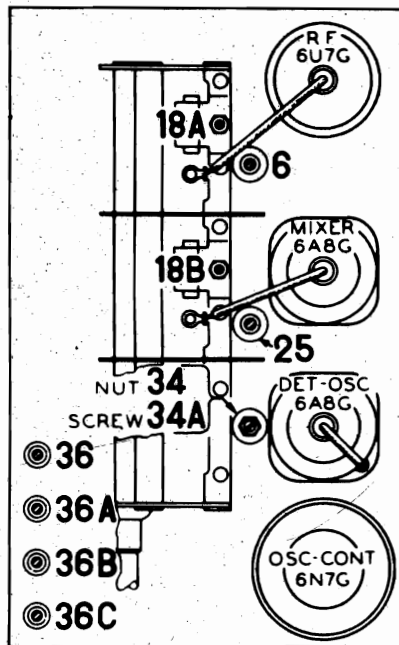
Top View of R. F. Unit Showing Compensator Locations
